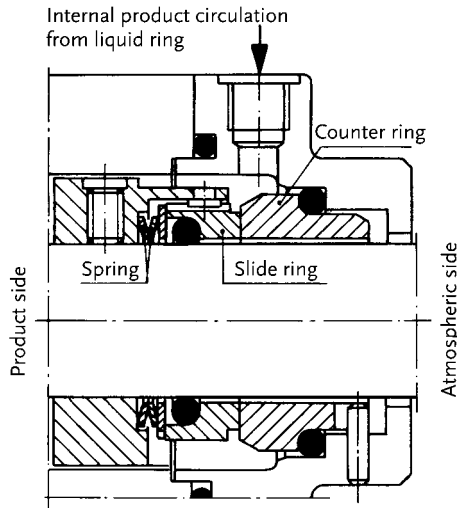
Single-acting mechanical seal (acc. to Burgmann)
